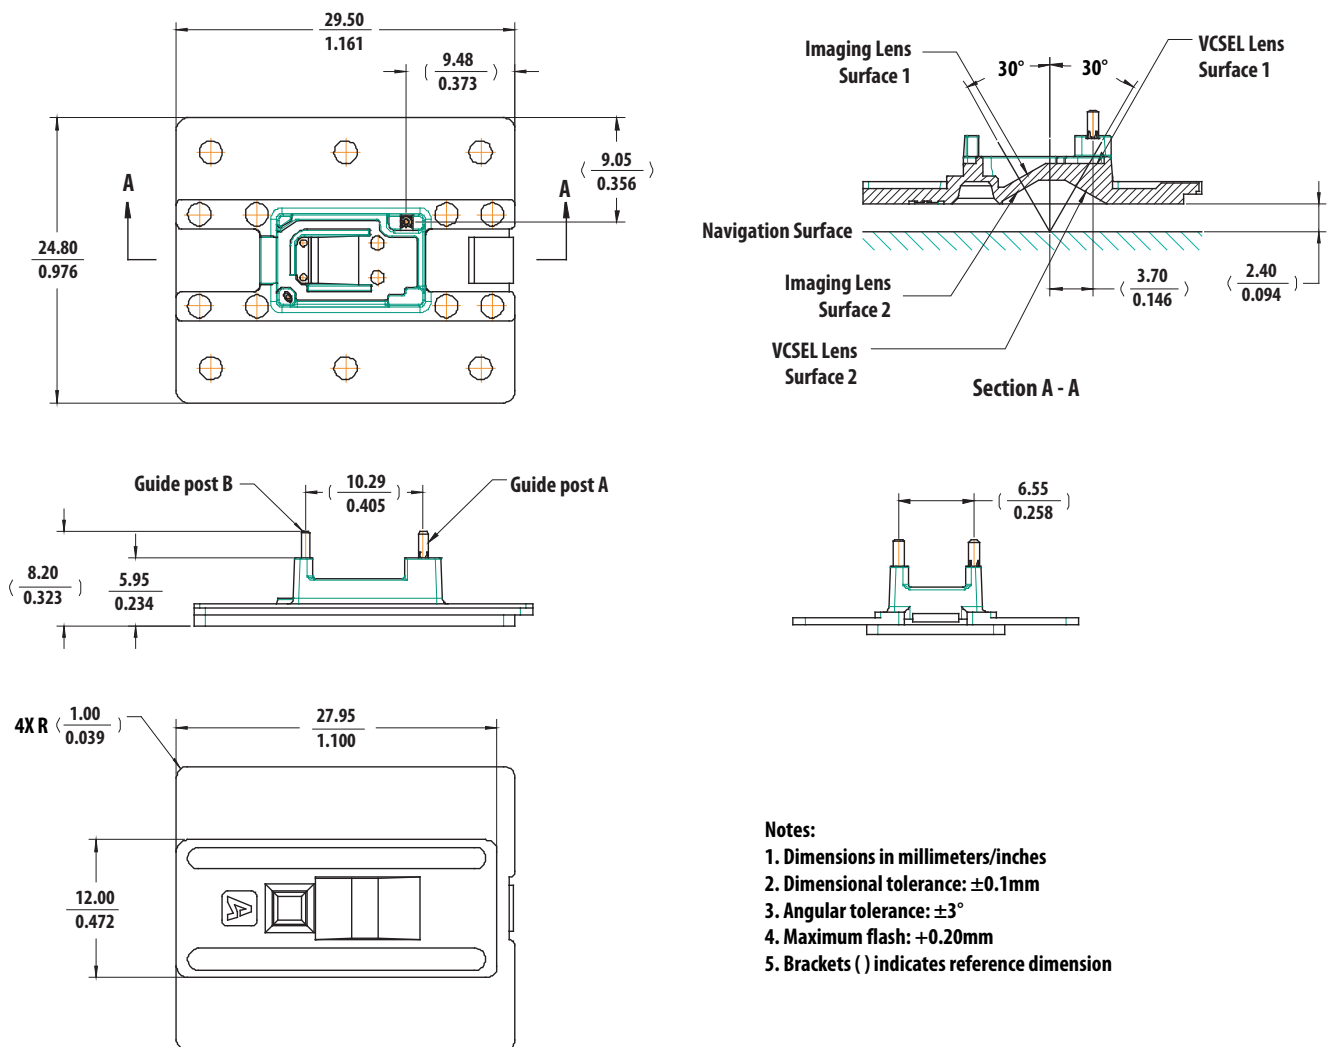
ADNS-6180-002 wide trim lens outline drawings and details
